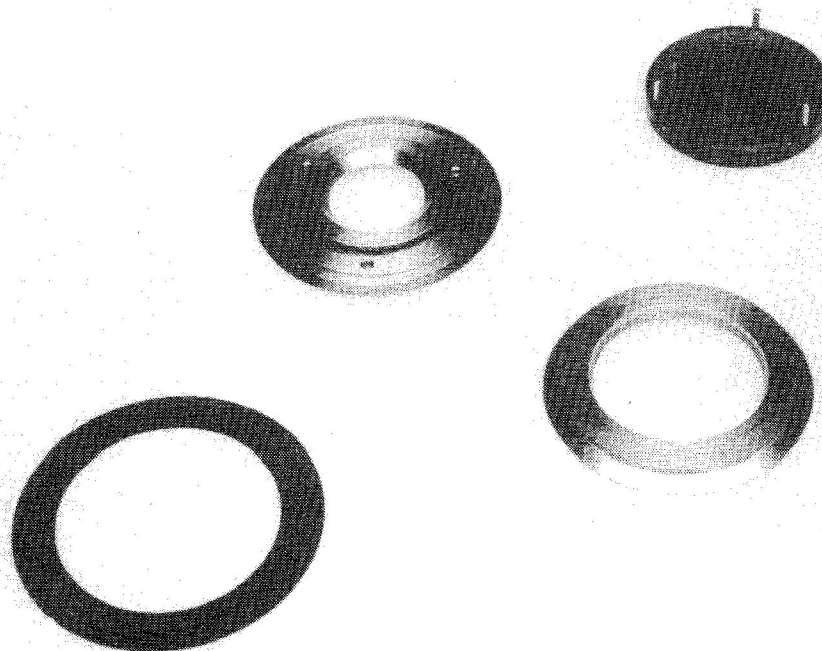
40-mm ID Hubless Blade, with Adapter and Disassembly Tool
